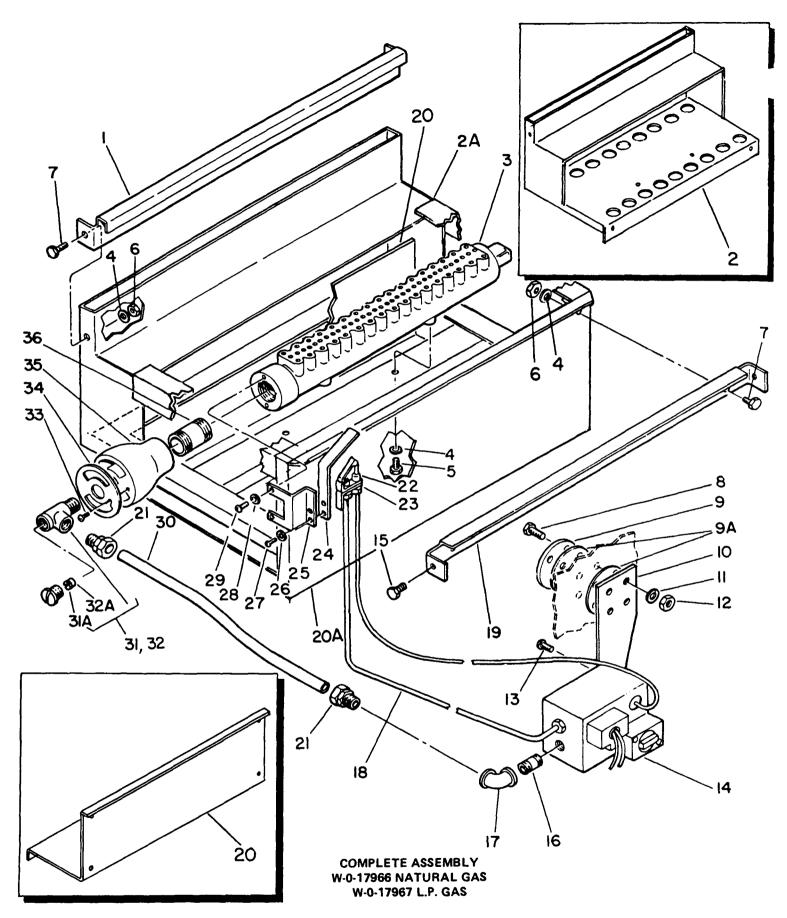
GAS BURNER ASSEMBLY (W-0-17966, NATURAL GAS) (W-0-17967, L.P. GAS)
